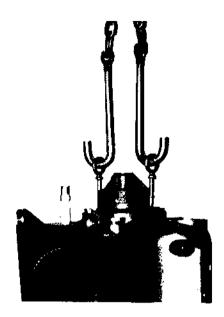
COMPRESSOR IN VERTICAL POSITION
